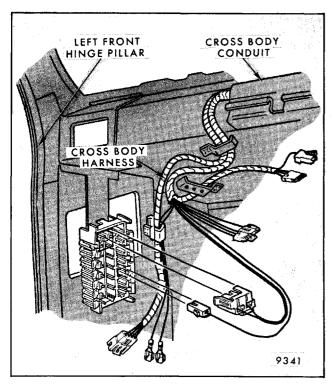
Accessory Junction Block (Left Side Shown, Right Side Similar)
